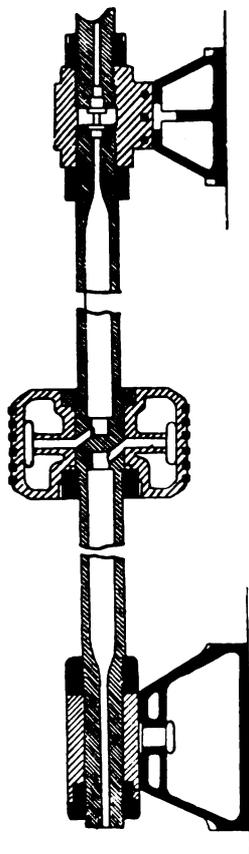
Elsassische Piston, Rod, and Crossheads.
